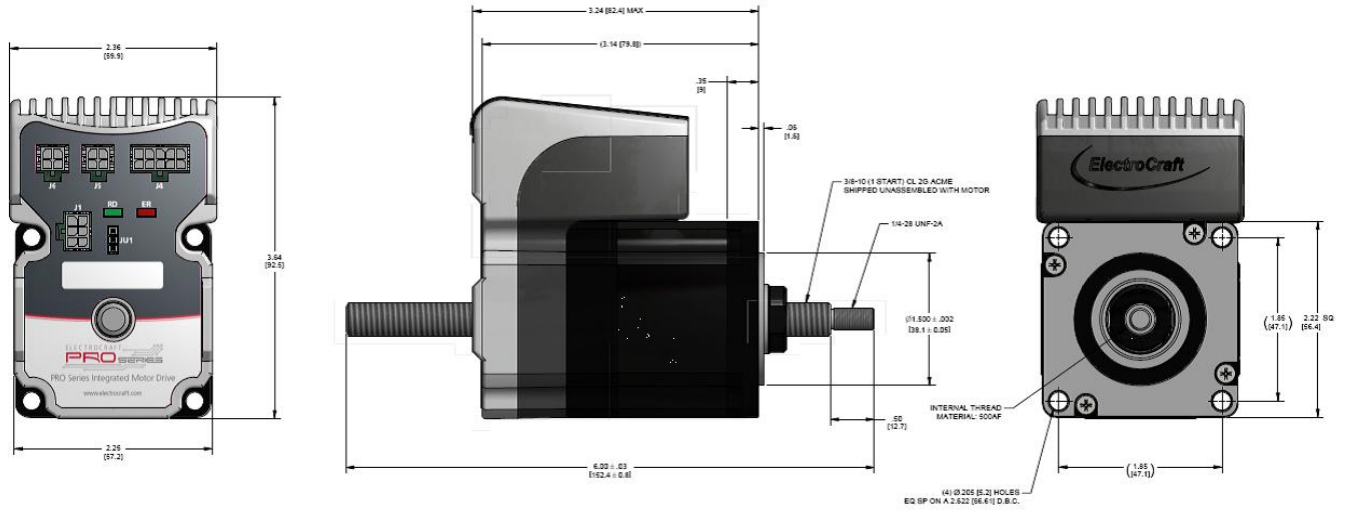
PS56-A106V48A-0SB7-D-CAN mechanical dimensions.
